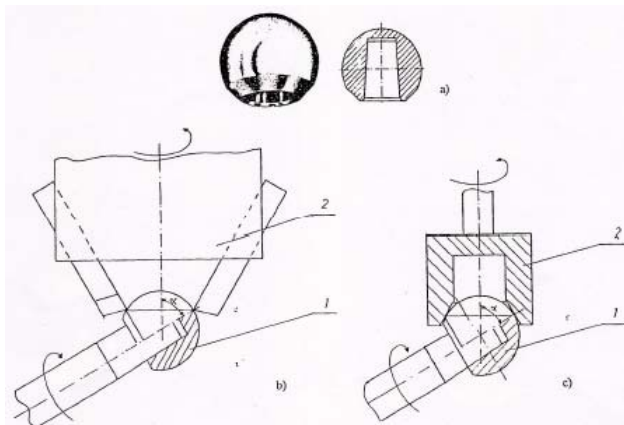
Scheme of processing sphere (a); milling (b); by grinding (c)
